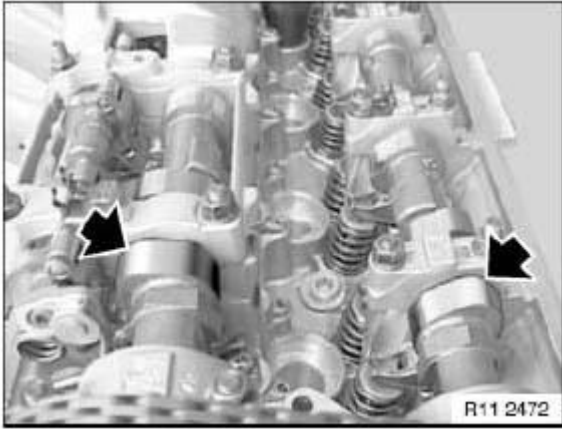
Identifying Inlet And Exhaust Camshafts Upwards Positions
